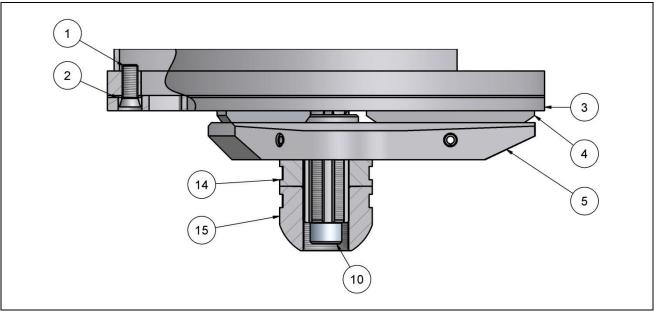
Adjusting preload of cutting blades with semicircular counter-nut (hard preload)
